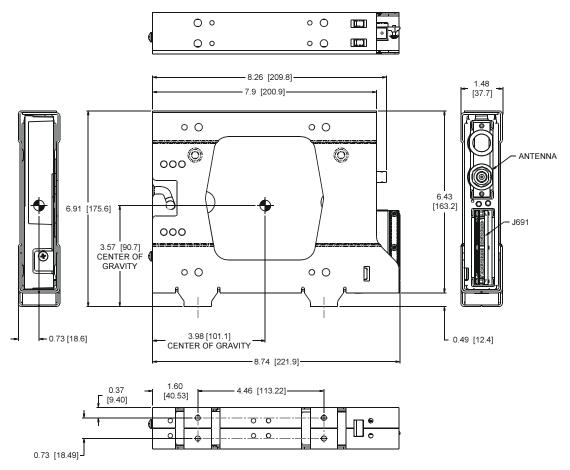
GDL 69/69A Remote Rack Unit Dimensions
